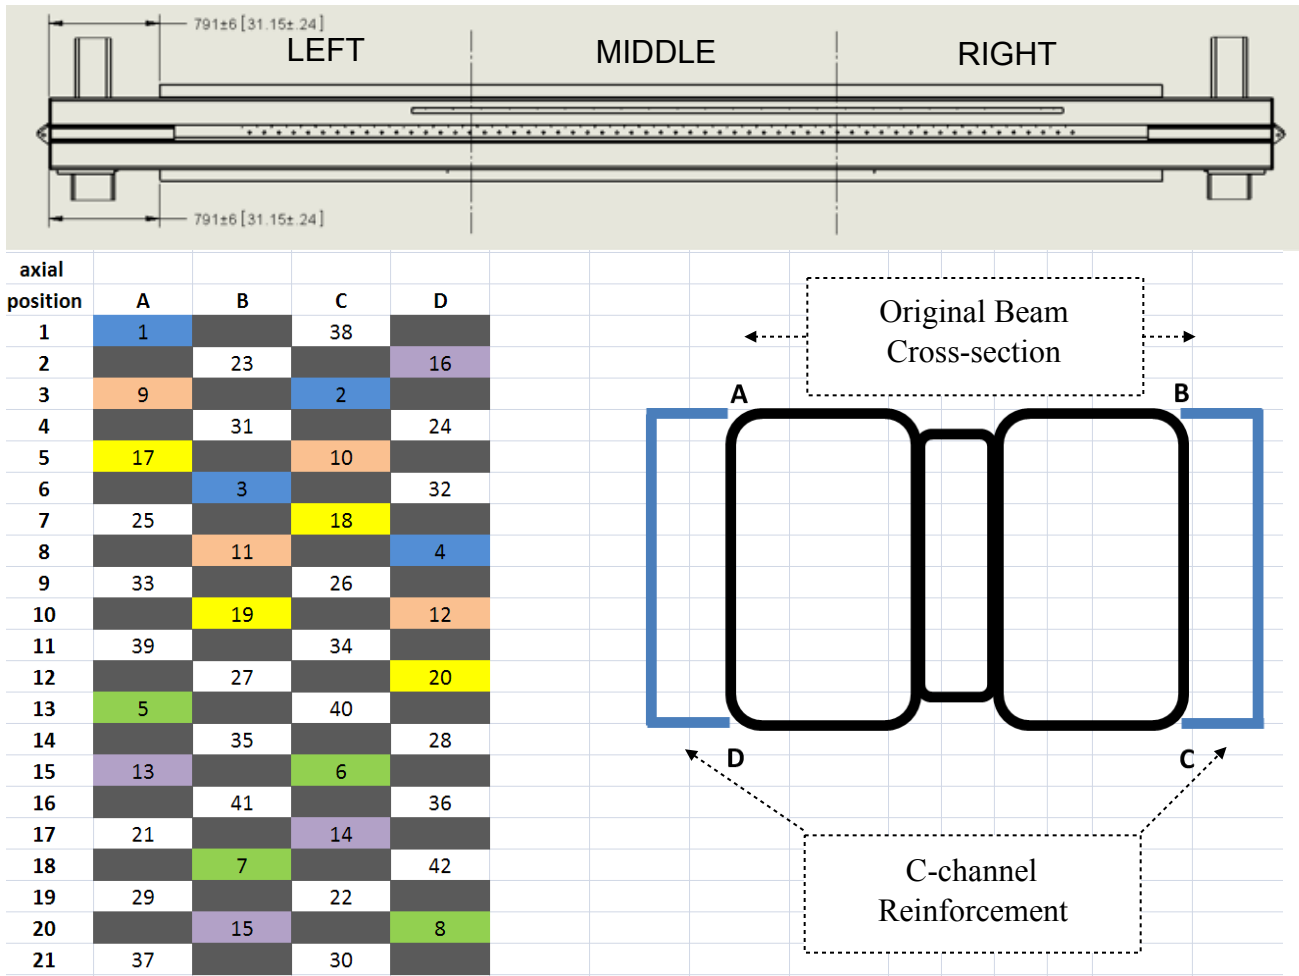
The welding sequence for C-channel (MC12x31) reinforcements to the lower-X beam of the HET structure. Weld length = gap length = 150mm. After initially stitch-welding the C-channels, the 42 weld pattern was repeated 3 times (for the middle, left, and right sections).
